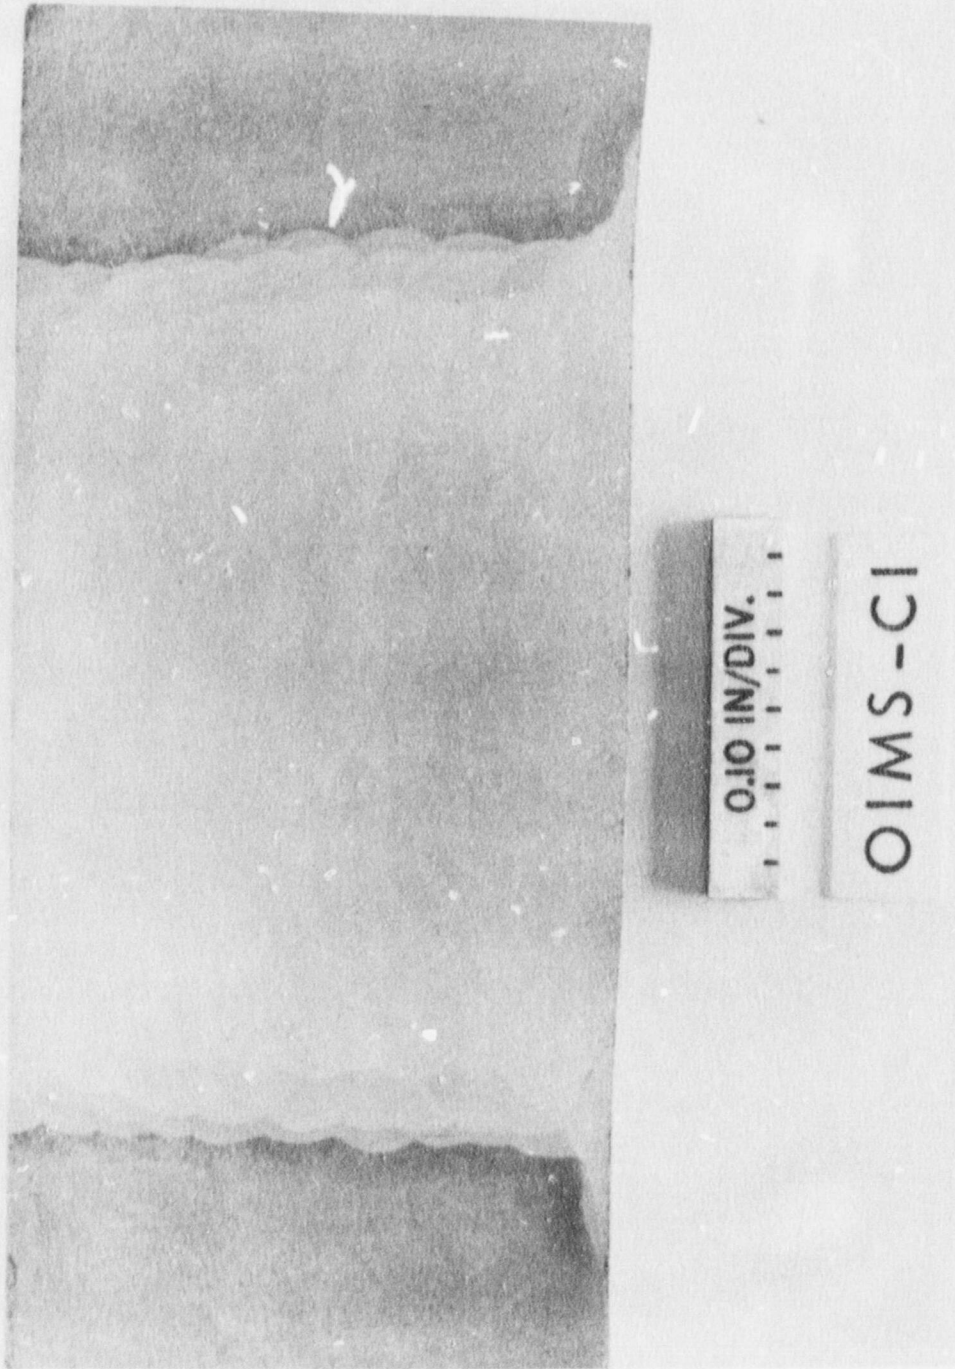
Cross section of the half-bead qualification weld 4W in test plate OIMS-C.
